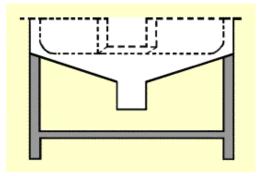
Front view of skimmer frame; broken lines are the removable part of the skimmer food contact area
